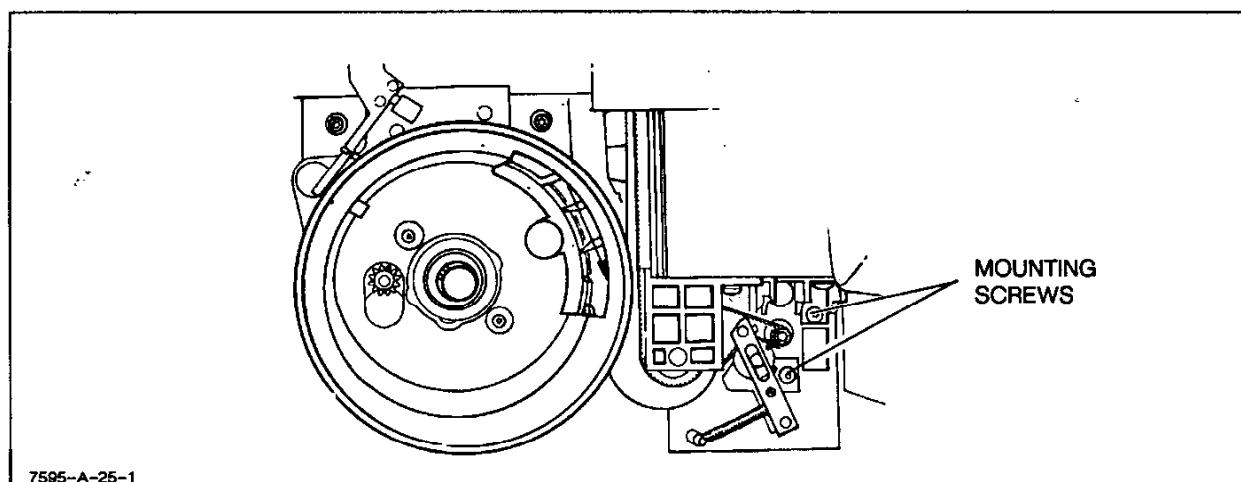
Pen Carriage Drive Motor/Encoder Removal
